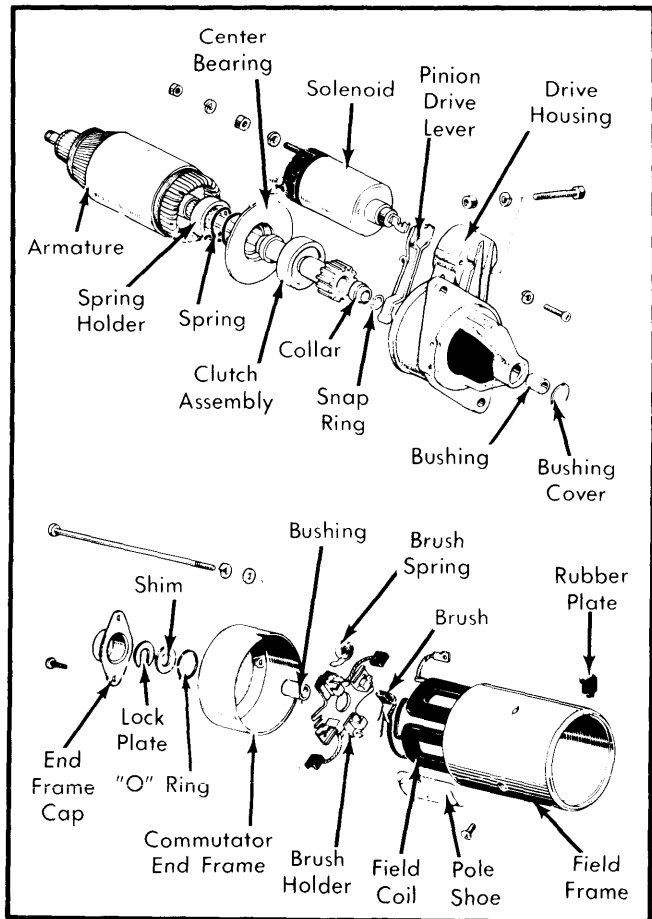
Disassembled View of Typical Nippondenso Direct Drive Starter Motor
